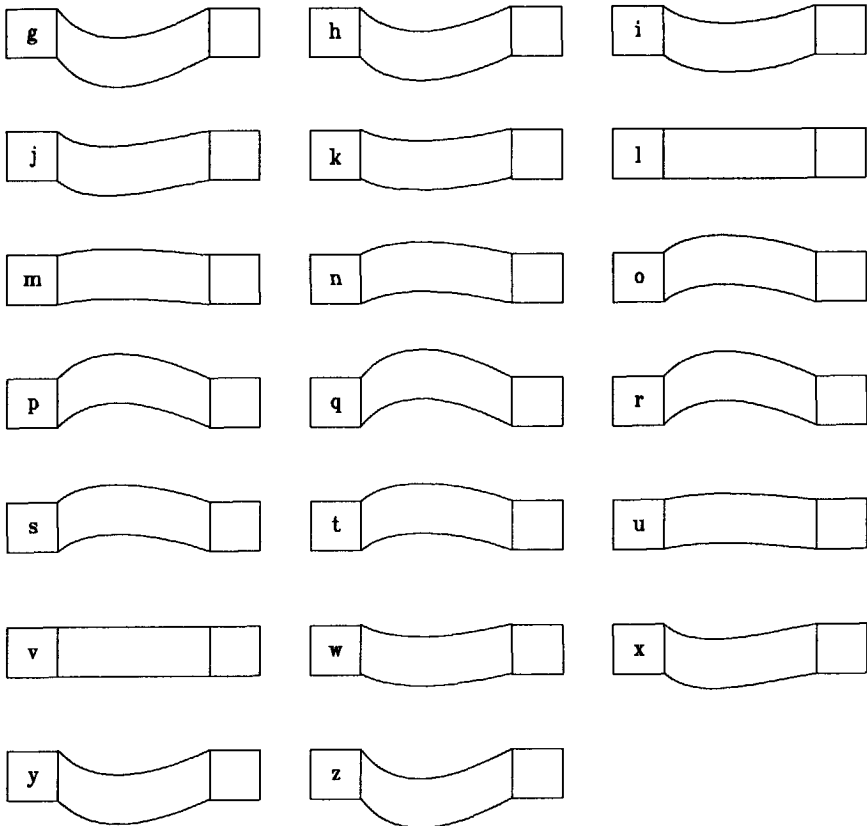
Schematic drawing of observed weld pool surface movement in the case of mode 3 oscillation (travelling arc welding) based on the analysis of film 4.
